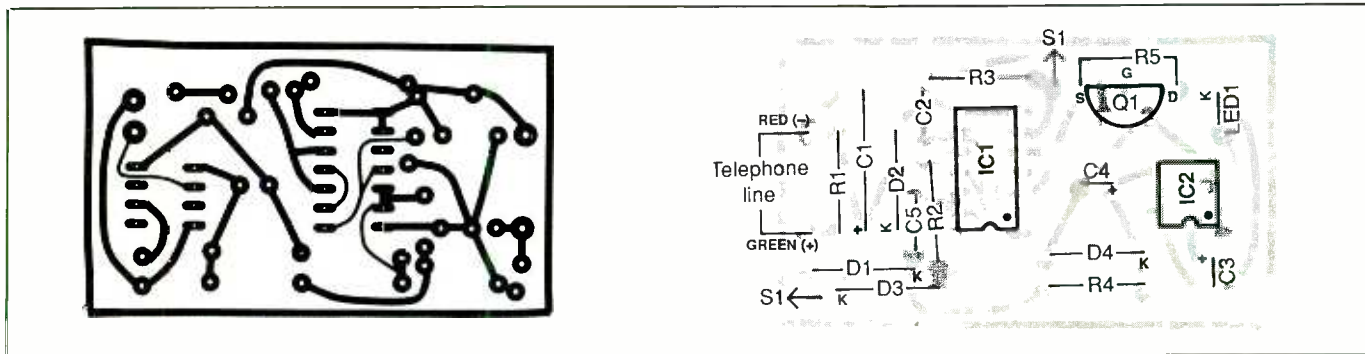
Actual-size etching-and-drilling guide (A) and wiring diagram (B) for Automatic Telephone Hold Device pc board.
